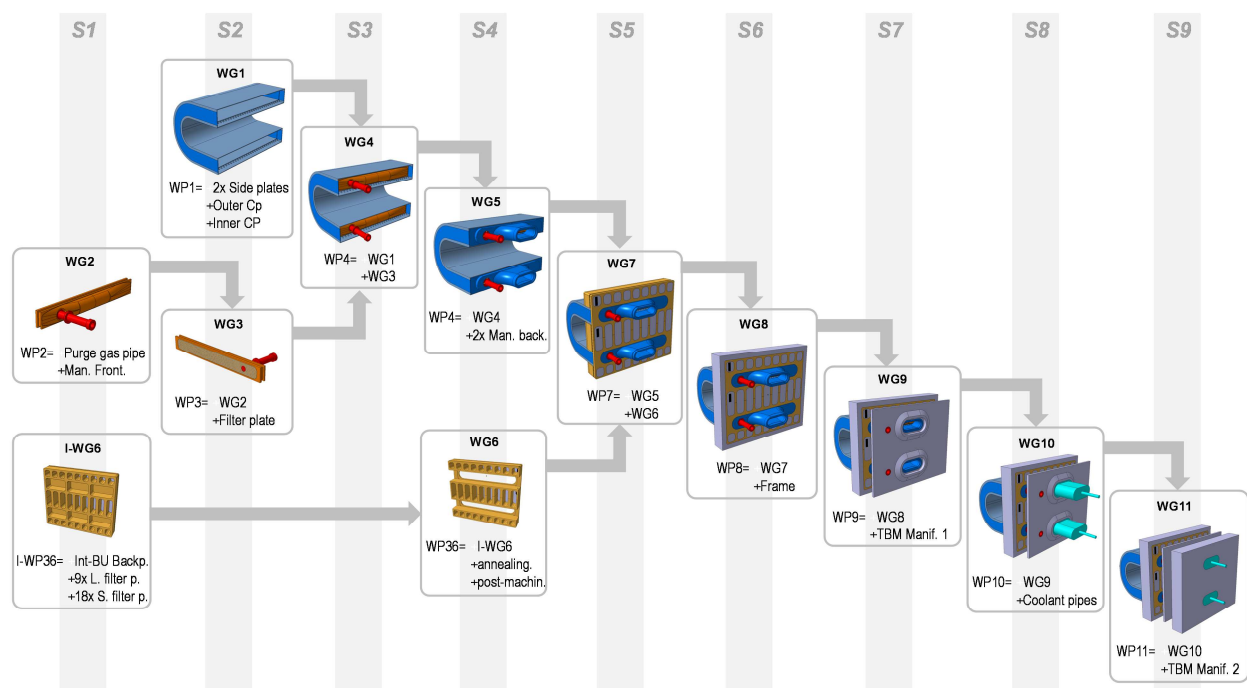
Assembly sequence of SHOBU (Hernández et al., 2014). Gantt-like chart of the 11 welding groups (WG), 1 intermediate welding group (I-WG6) and the 9 assembly stages. The resulting WG7 in stage S5 represents a complete relevant HCPB Breeder Unit mock-up. S6 mimics the insertion and welding of the relevant HCPB Breeder Unit to the HCPB TBM Box. Stages S7 to S9 imitates the insertion and welding of the “Coolant Pipes” and the “TBM Manifold” plates, completing the assembly of the HCPB TBM.
